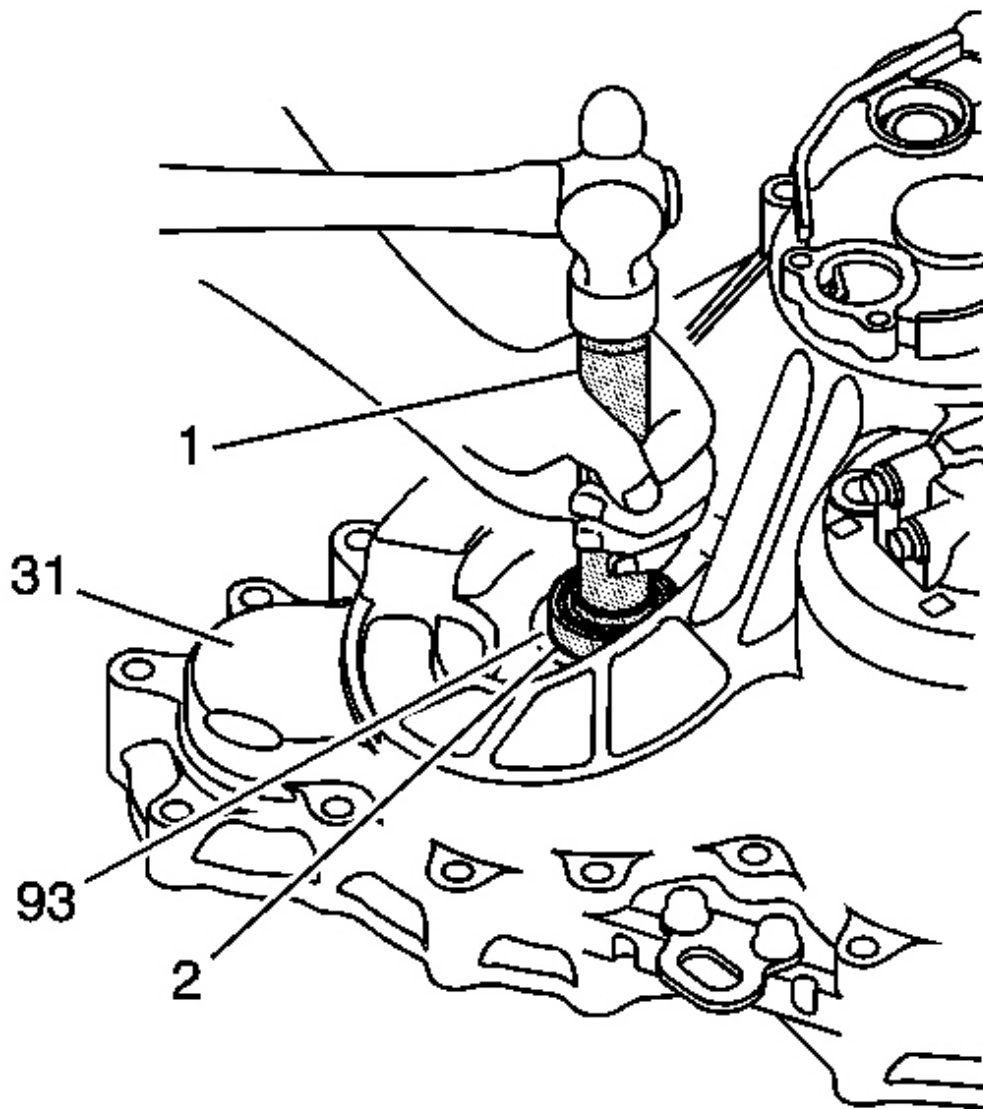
Installing Front Wheel Drive Shaft Fluid Seal Into Transmission Case Using DT 46429 & EN 46342
